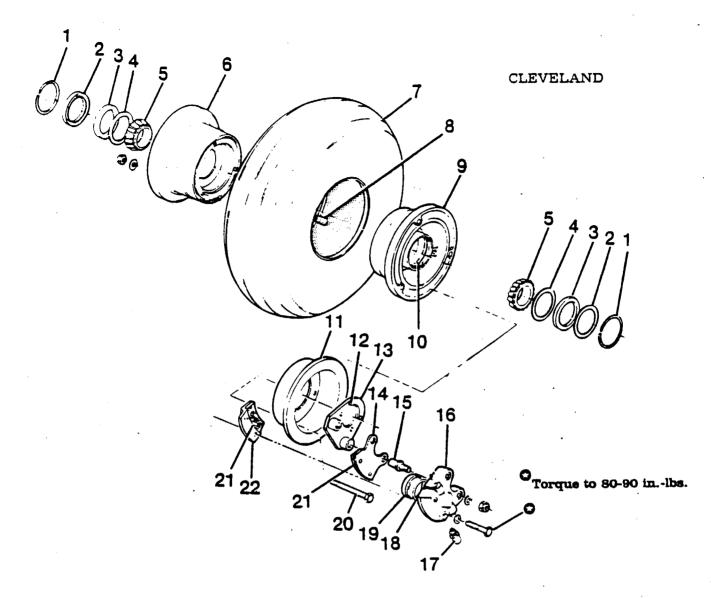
Main Wheel and Brake (Sheet 1 of 2)
